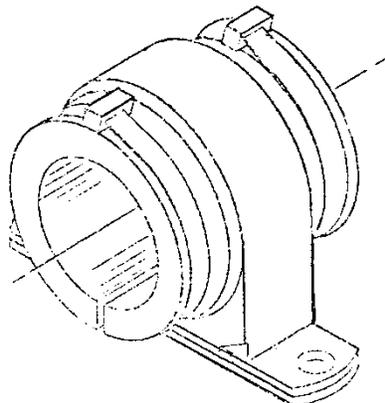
SINGLE SIDE SADDLE CLAMP
